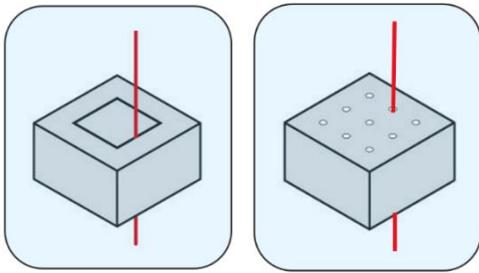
Left: submerged threading in the workpiece slot without auxiliary jet. Right: submerged threading in the workpiece holes (\varnothing wire +0.1mm) without auxiliary jet.
